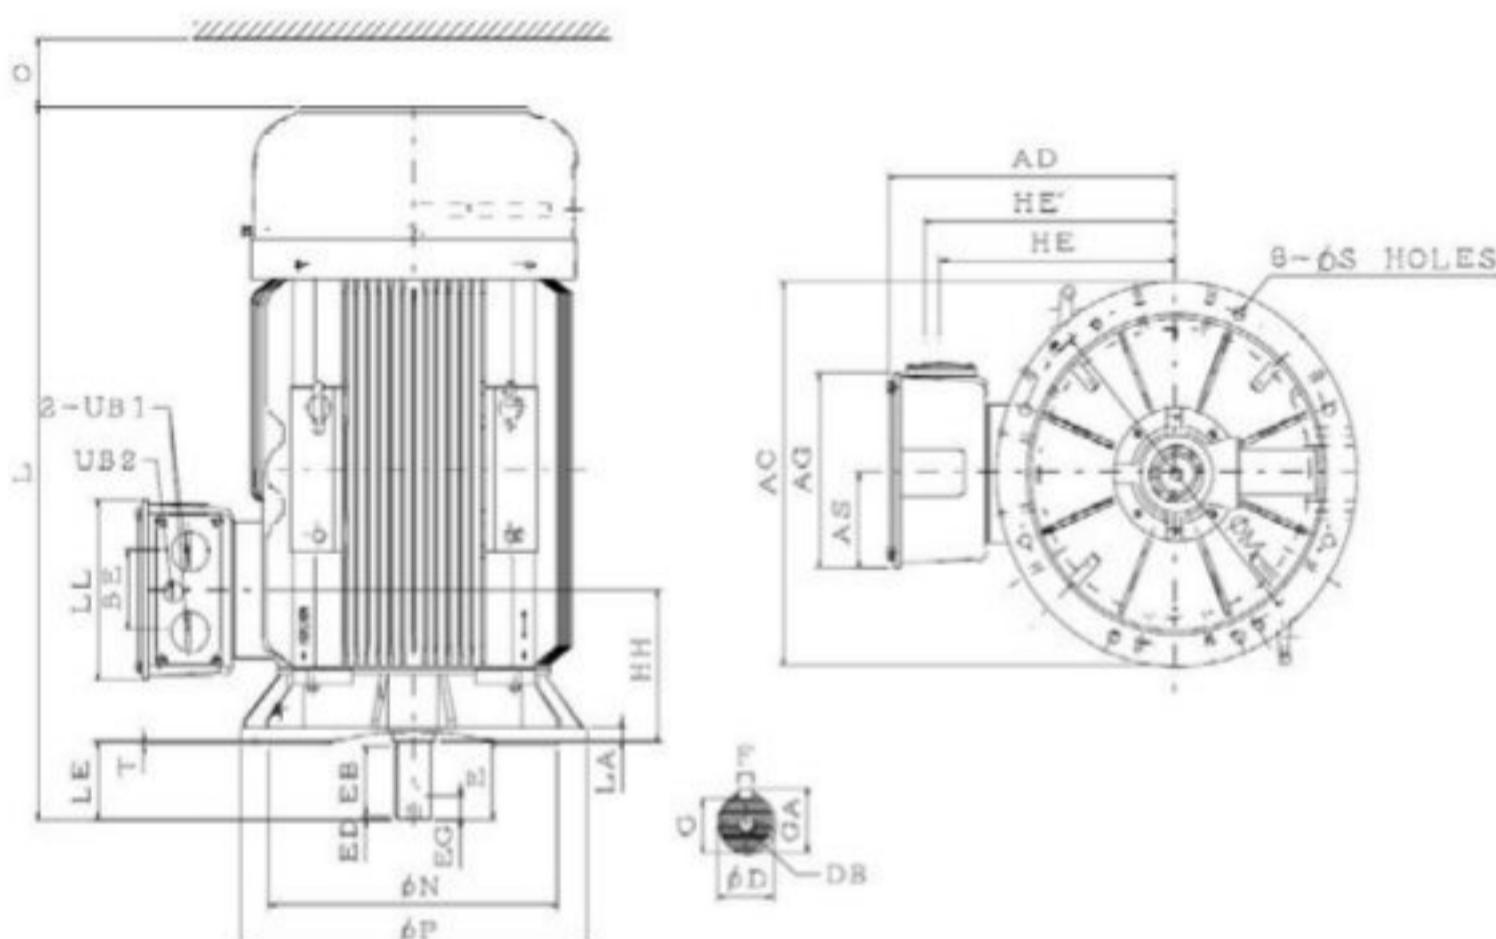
Outline drawing of cast iron design, mounting V1; frame size 315S – 315M
